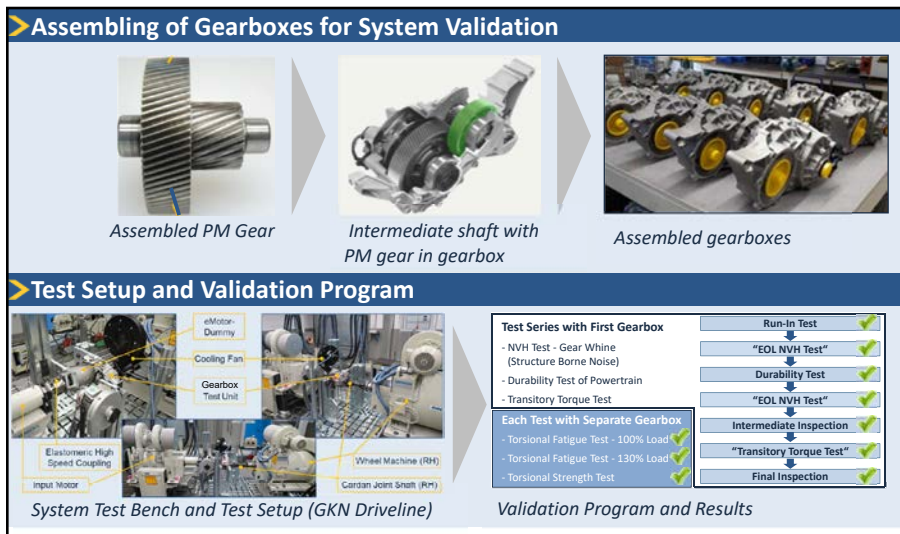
Assembling of gearboxes, test bench setup (GKN Driveline) and results.
